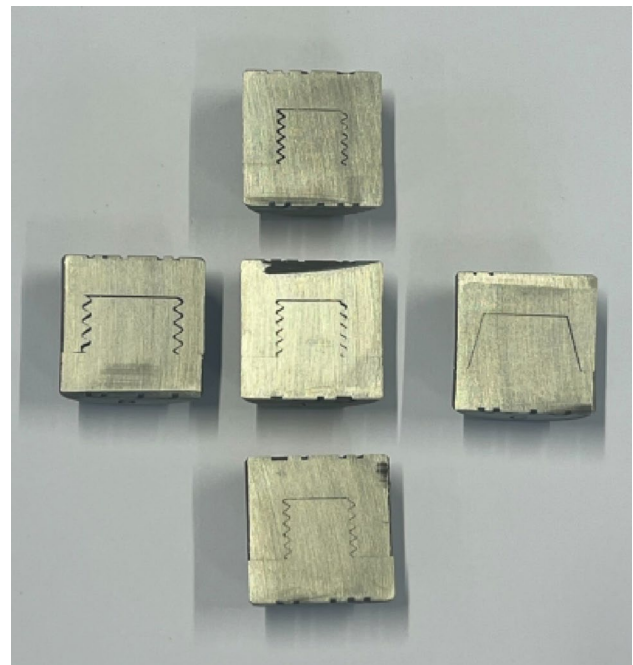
Picture of the cylindrical specimens sections prior to polishing operations, showing a visible internal interface among the lower and upper parts
